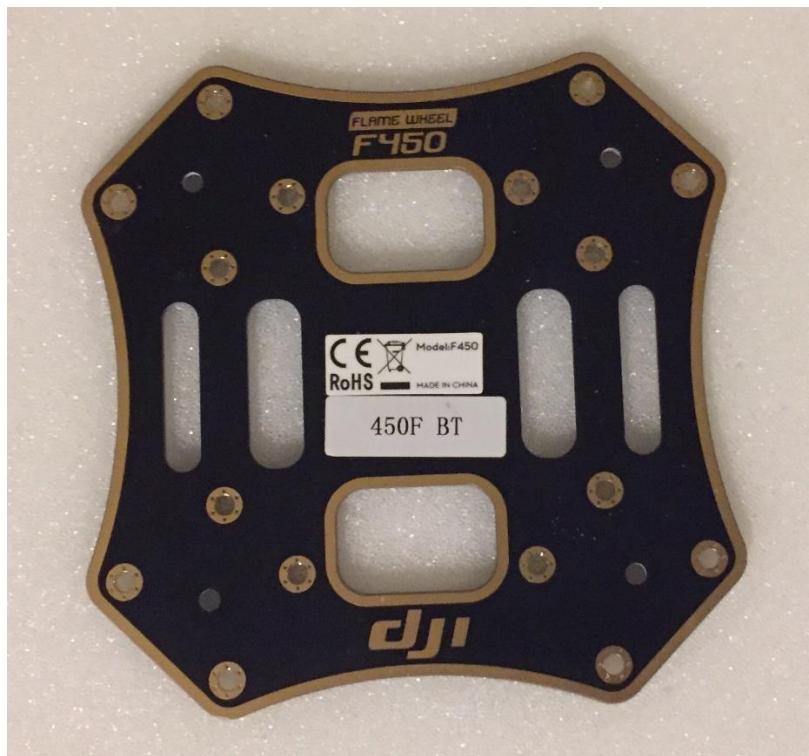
The top plate was removed, and holes were drilled for standoffs.
